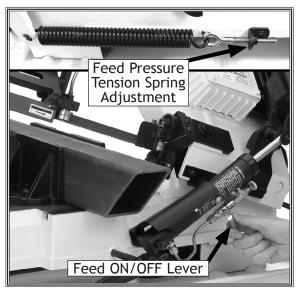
Bandsaw operating and starting feed before blade contacts workpiece.
